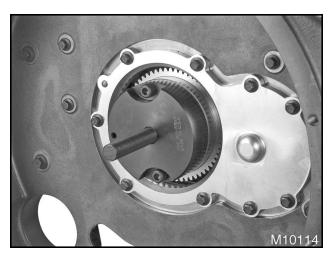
Crankshaft Rear Seal / Wear Sleeve Installer (base)
